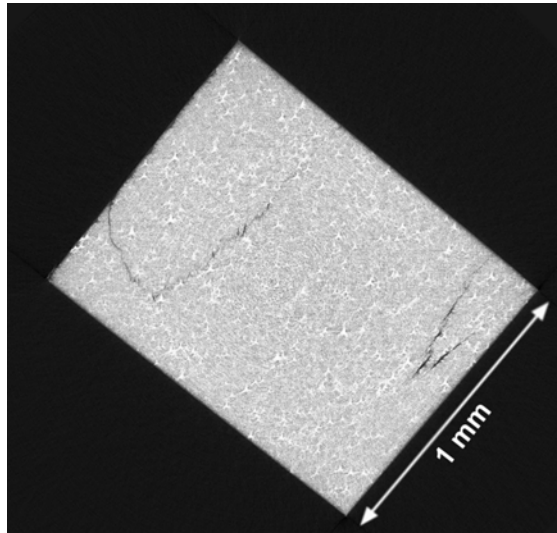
Cross section of the root flaw in a plane perpendicular to the welding direction.
